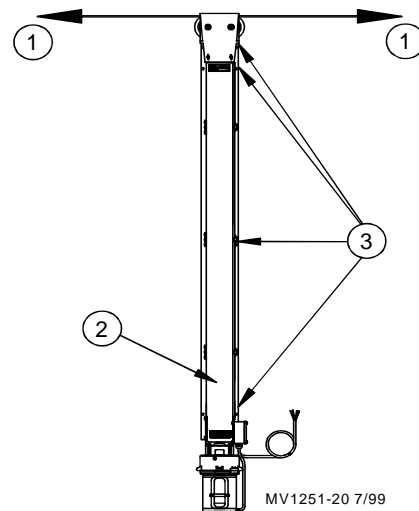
LINEAR-LIFT Installation (vertical wall view)
